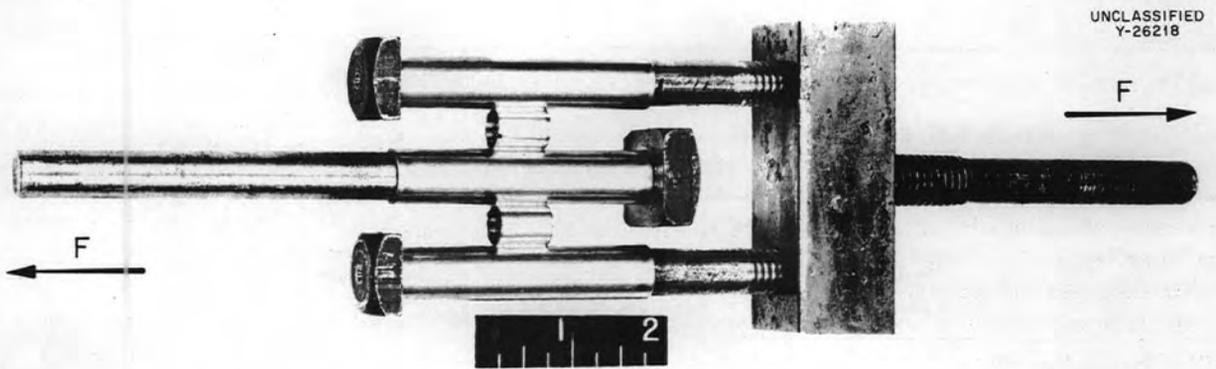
Testing Fixture for Evaluating Strengths of Brazed Joints.
